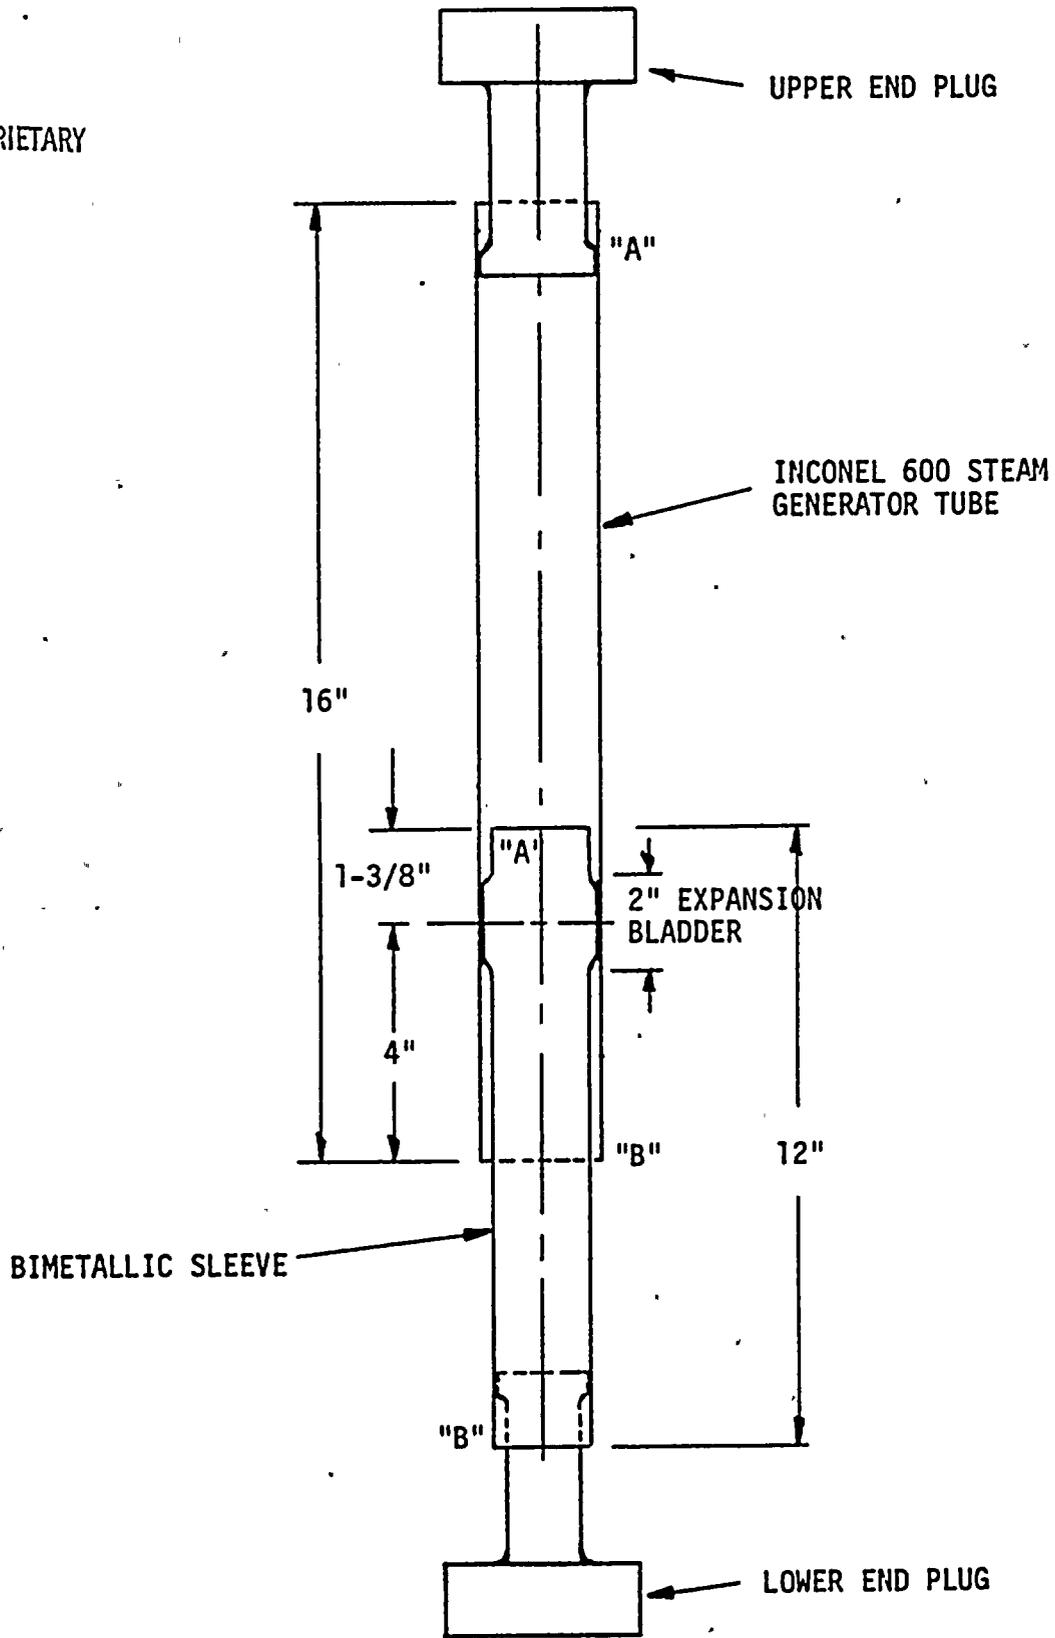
Design of Upper Sleeve-to-Tube Joint Strength and Joint Leak Rate Test Specimen
